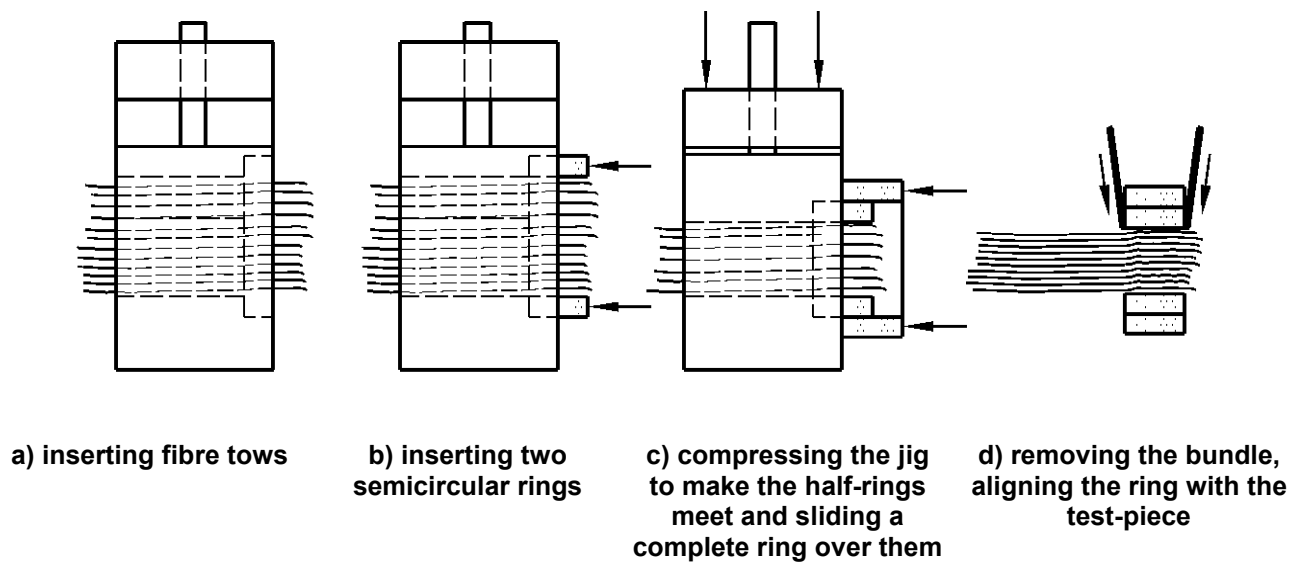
Method of manufacturing test-pieces using the compression jig
